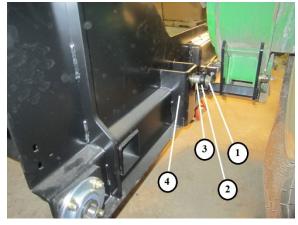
Fastening Front Belt Frame Key 1 – Bolt 7/8"-9x4 Grade 8 Key 2 – Swivel Key 3 – Bushing Key 4 – Front Belt Frame
